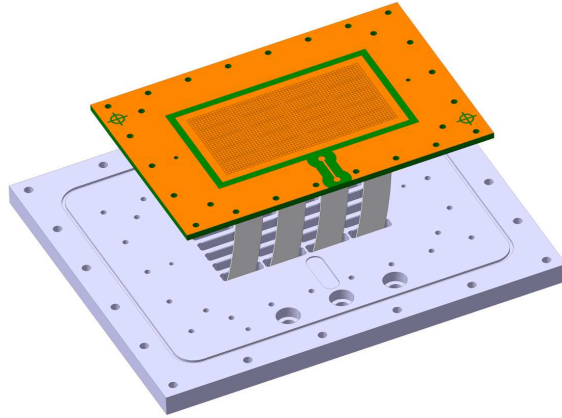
(Color online) Drawing of the pad plane and aluminum frame assembly.
